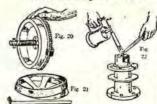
The thrustbearing assembly is held together by three old valve springs.
